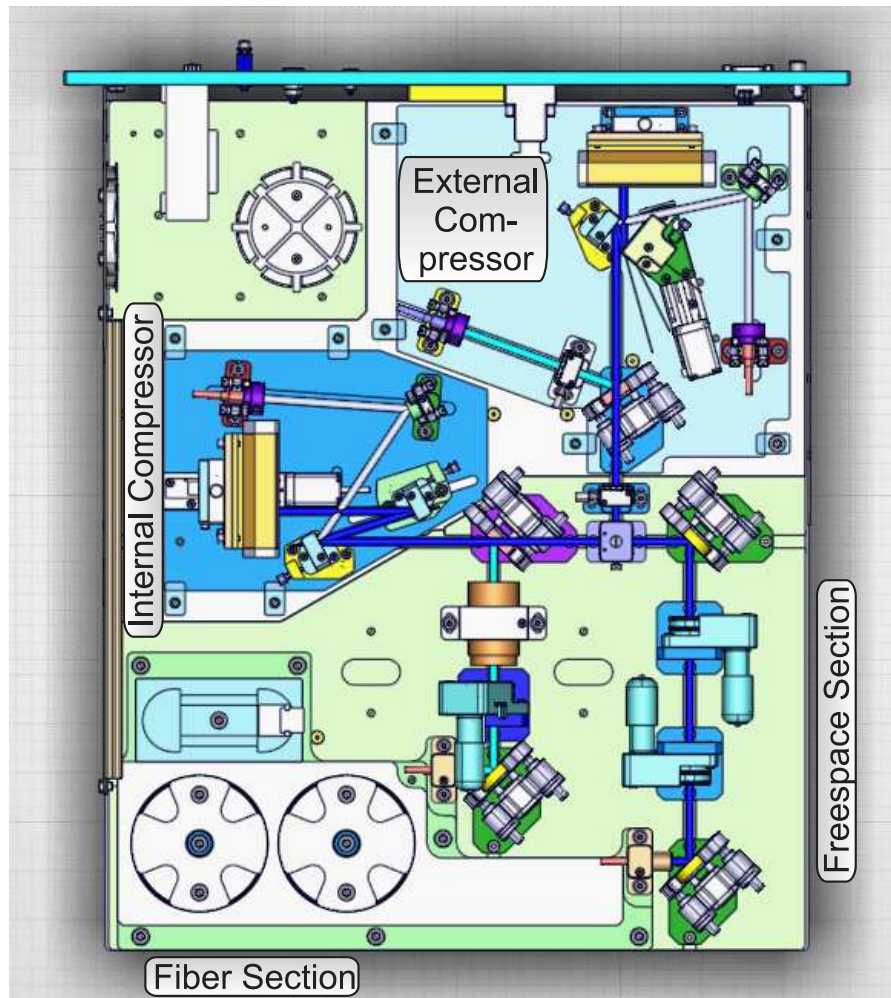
Drawing of the compact laser packaging fitting inside a 19" rack F. Müller [27].
